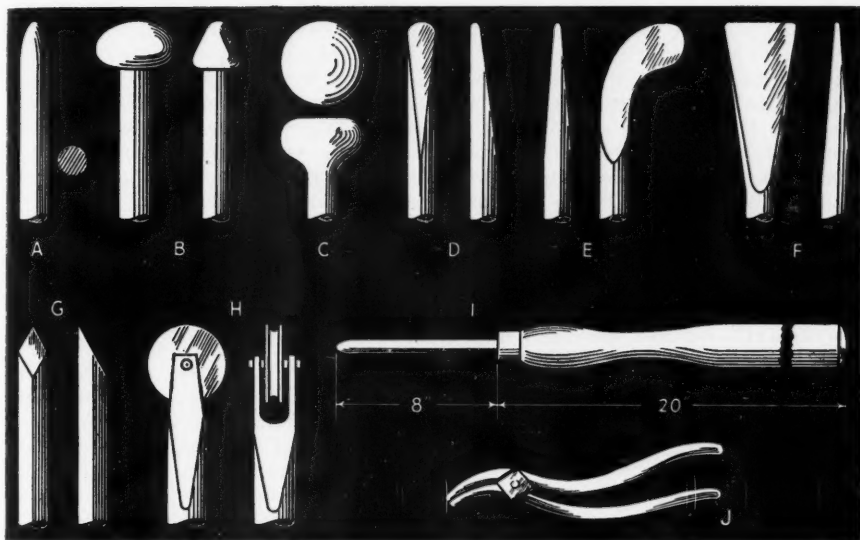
Hand-spinning Tools. A. Round Nosed; B. Raising-up Tool; C. Knob Raisers; D. Turning-over Tool; E. Groover; F. Planishing Tool; G. Trimming Tool; H. Beading Wheel; I. Dimensions of Average Spinning Tool; J. Spinners' Pliers.
